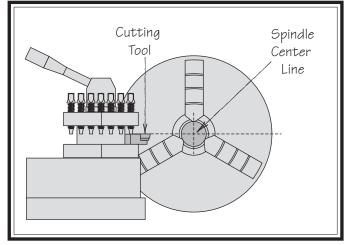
Cutting tool aligned with spindle centerline (viewed from tailstock).
